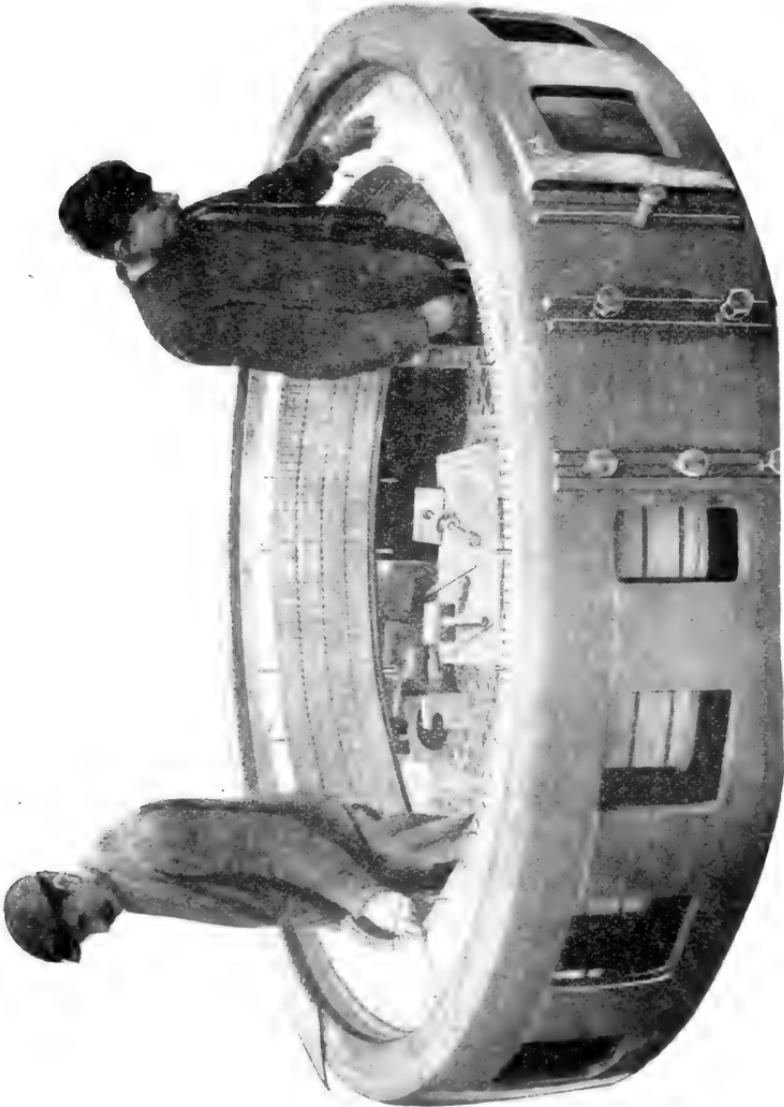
Assembling the Core of a large Revolving Field Type Generator. Bruce Peebles.
